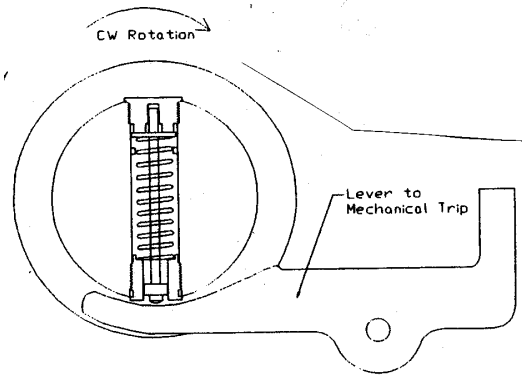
Mechanical Overspeed Trip Mechanism (End View).
